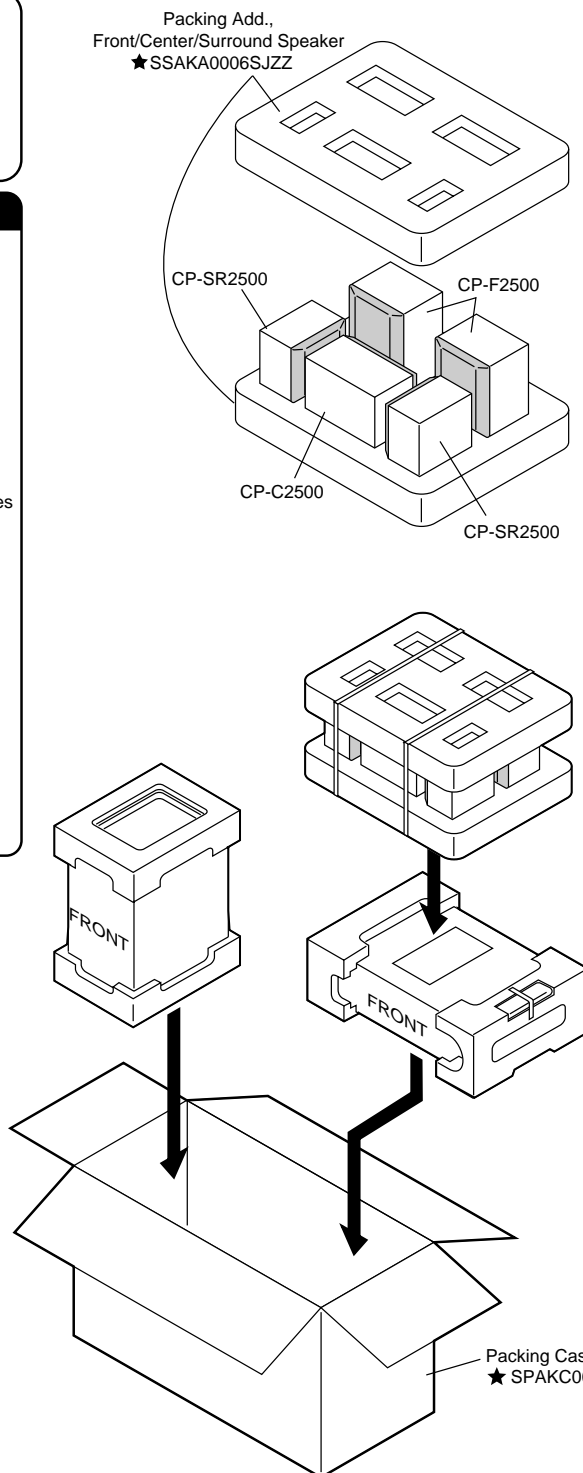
SPEAKER EXPLODED VIEW (3/3)
